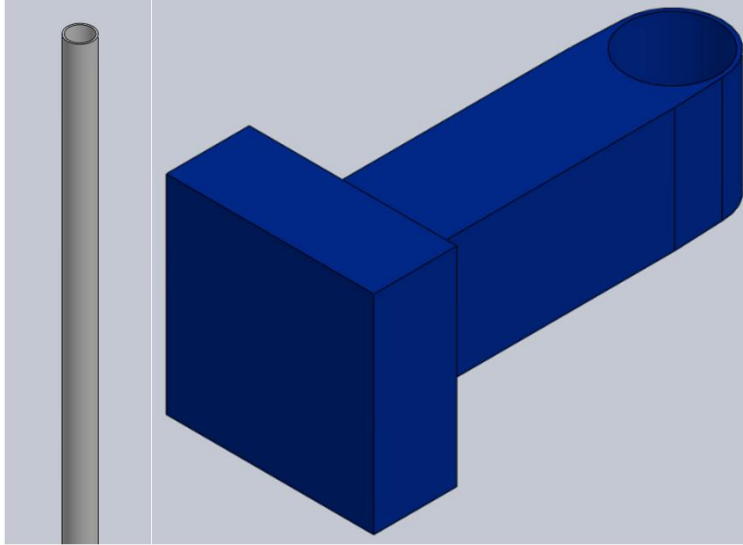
Isometric Views of Inner Sheath (Left) and Inner Sheath Slider (Right).
